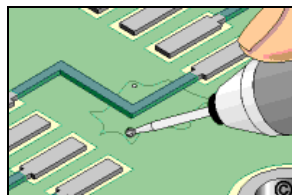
Drill into the delamination blister using a Ball Mill and a Micro-Drill.
